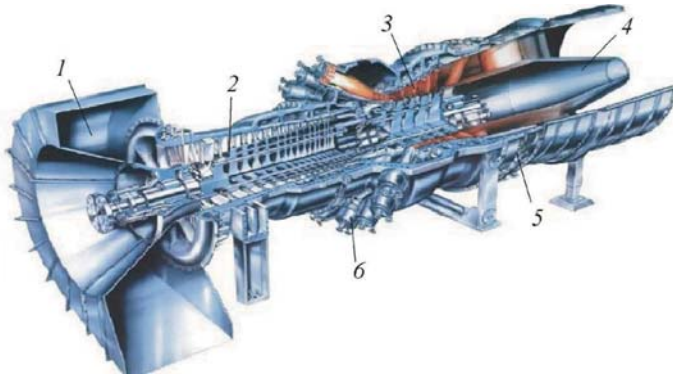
Siemens Energy SGT6-6000G engine with axial-type exhaust device:
